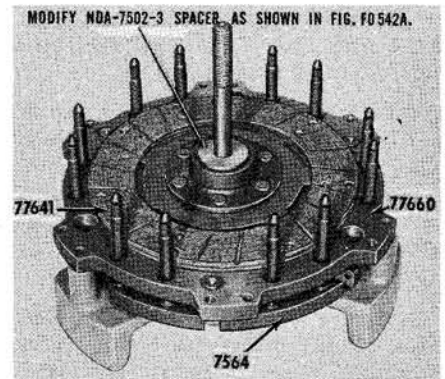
Position center drive plate and pto clutch disc over fixture as shown. Be sure to align correlation marks or properly space balance marks as outlined in text.
